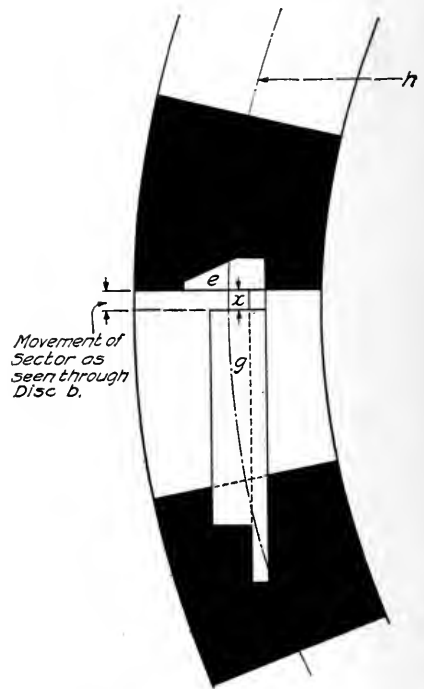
Detailed Drawing showing how Angular Deviation is measured on Disk  $a$
